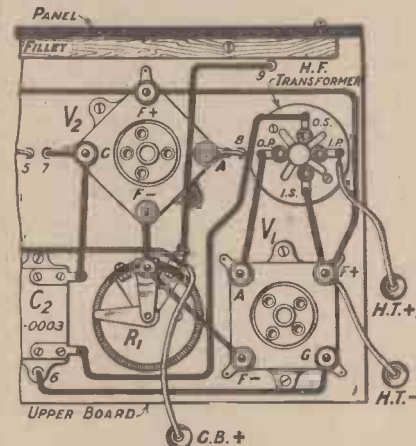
The components for the H.F. stage are arranged as shown in this drawing.
